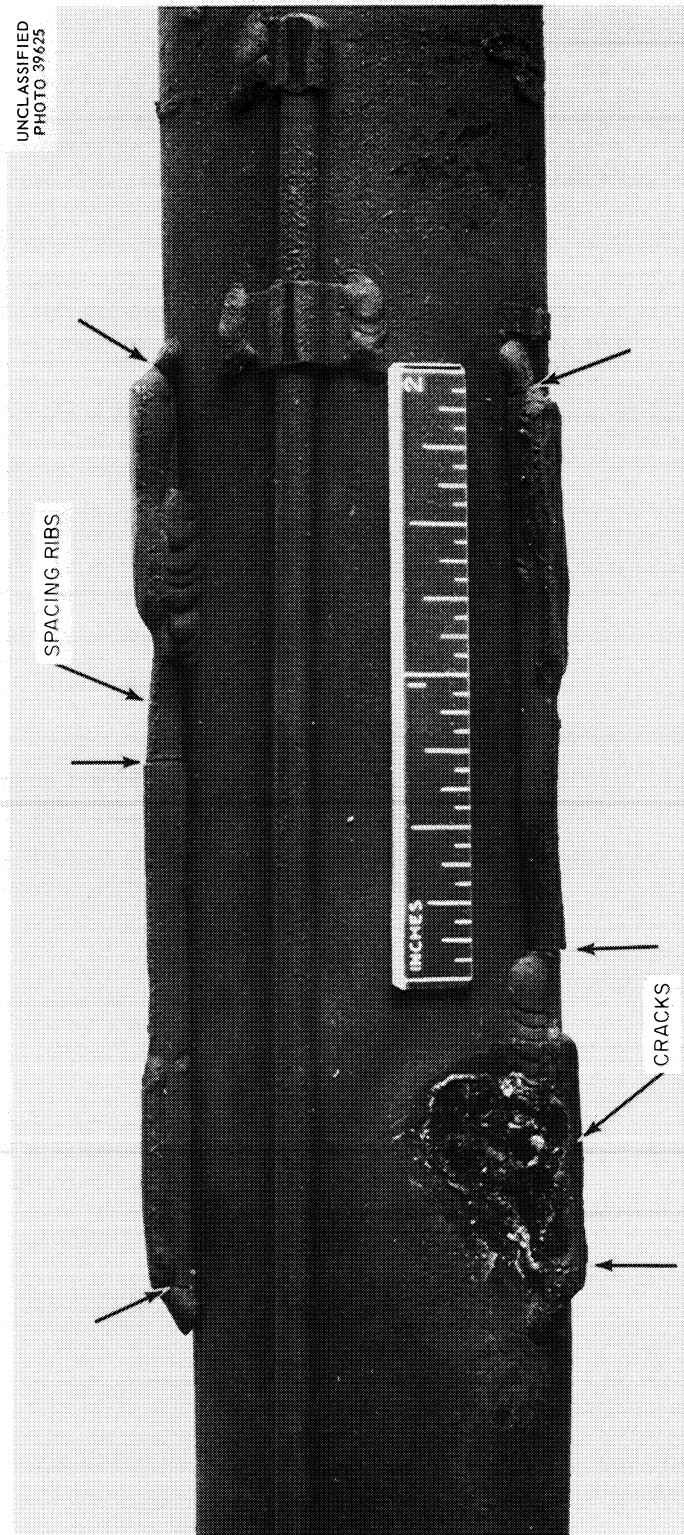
Failure of 1-in. Cooling Tube at 6-in. Elevation.
